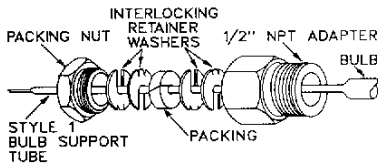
Part Number FTG13A-600R packing nut assembly. (Use with Style 1 bulb with support tube for direct immersion applications.)
